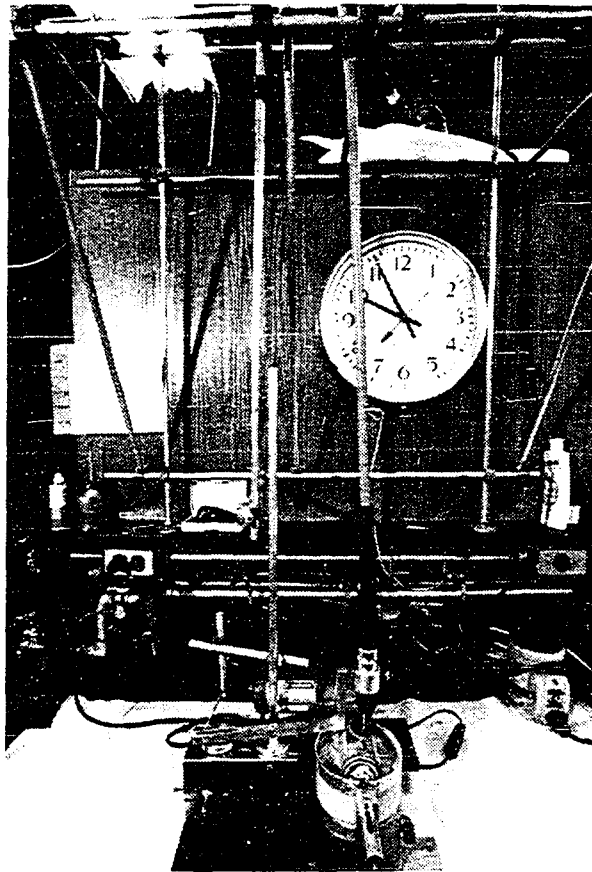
Cylindrical-surface polishing machine, showing mounting and the vertical drive shaft to buffing wheel
